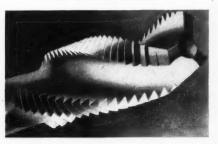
Twist Drills for Use in Drilling . Aluminum
